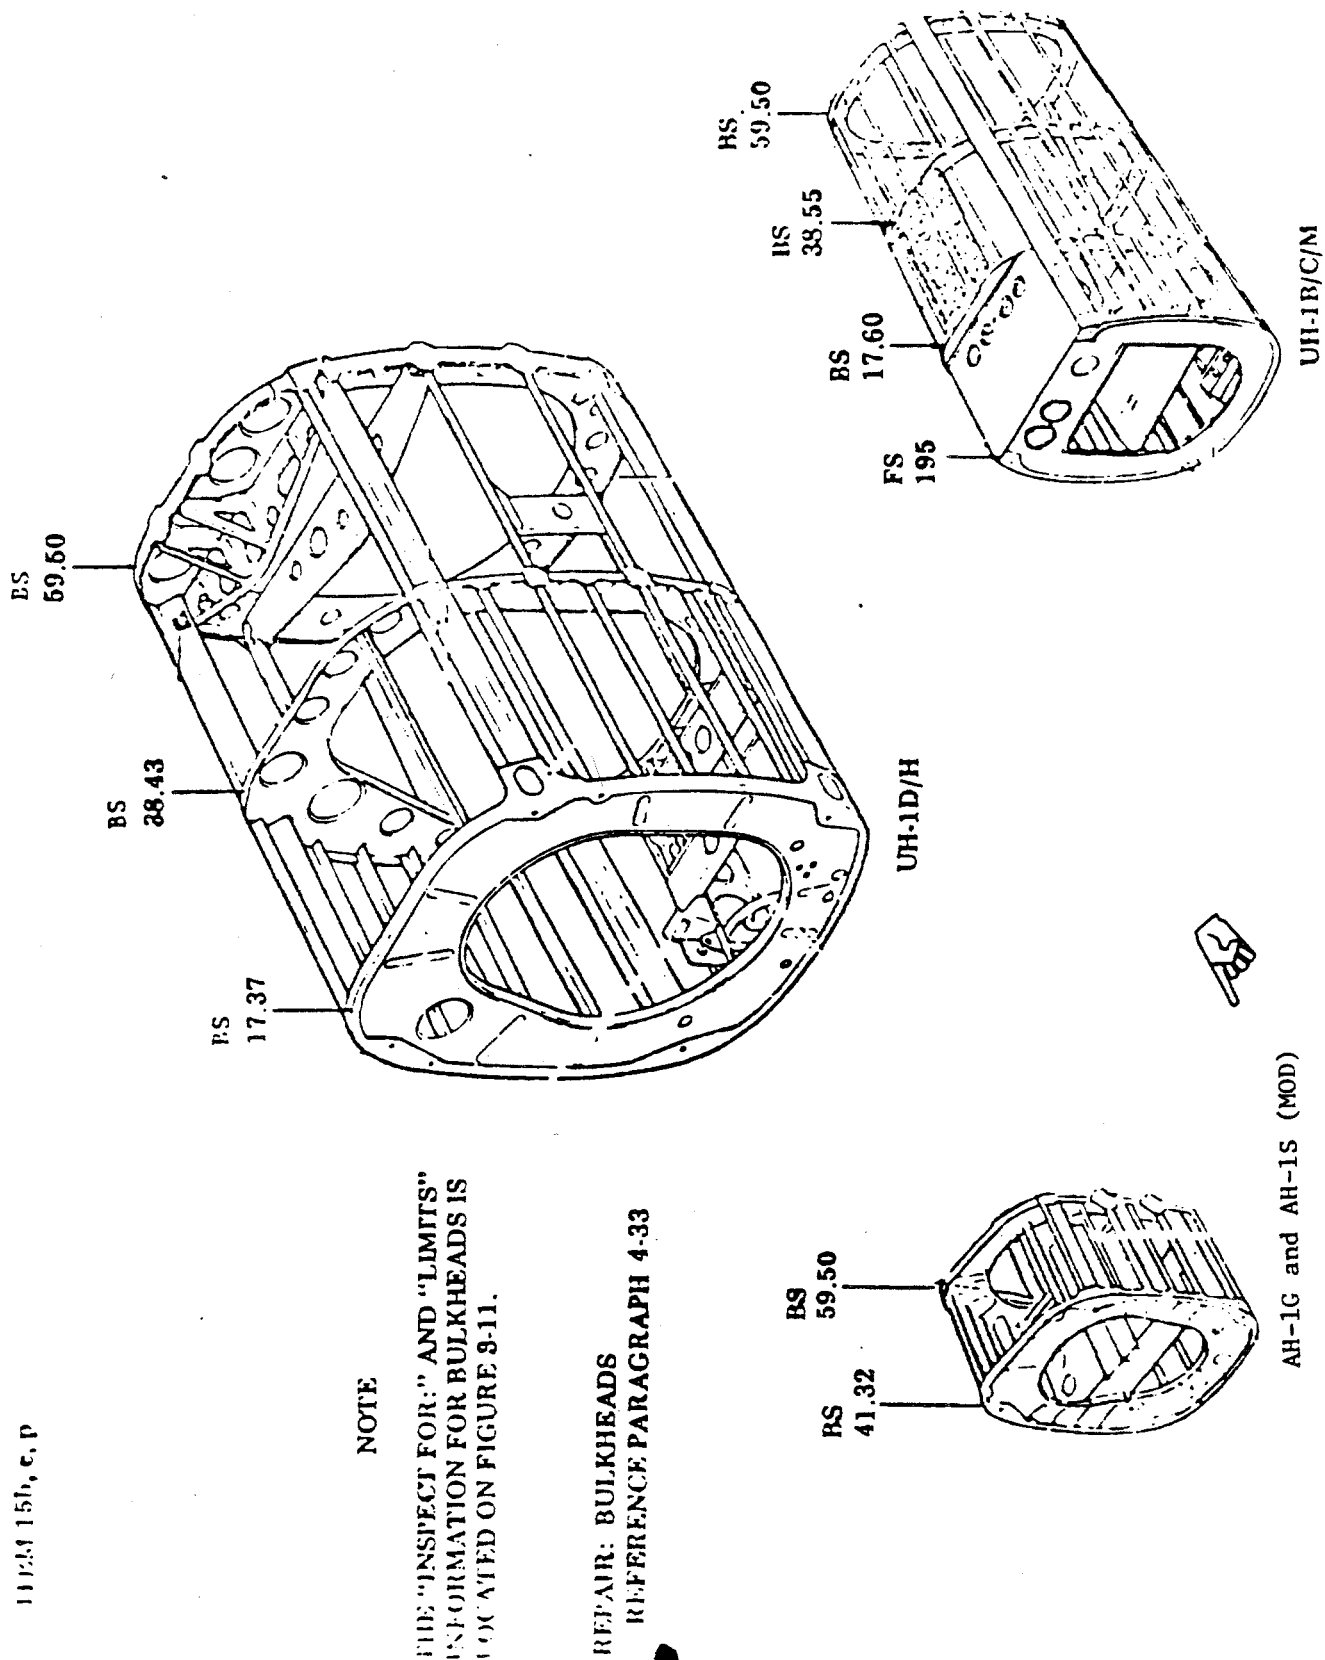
TAIL BOOM ASSEMBLY BULKHEADS (H/M/1G/1S (MOD) (SHEET 1 of 2)
